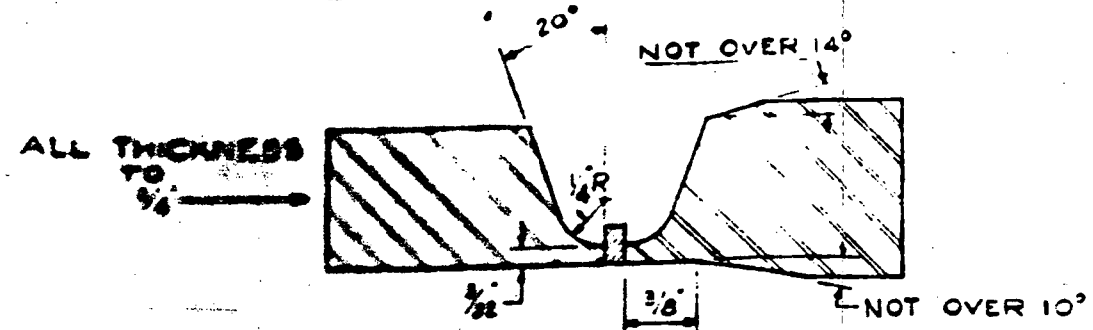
DIMENSIONS OF CONSUMABLE INSERT BACKING RING
